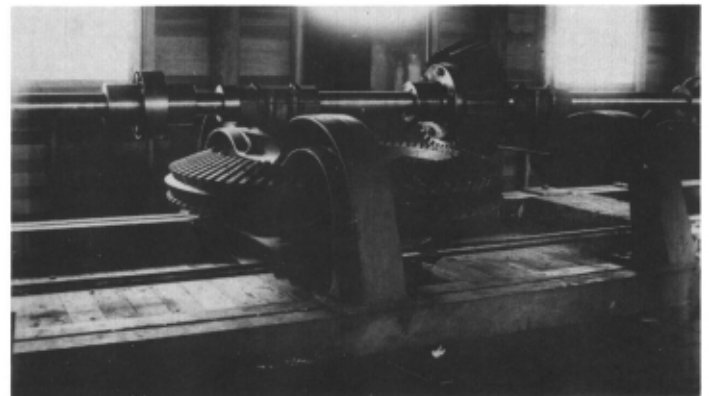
One of Eight Turbine Bevel Gear Drives to Generator - 1898
